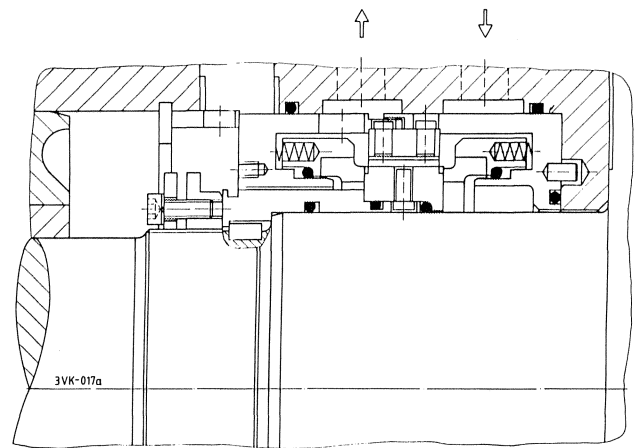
Stationary (Spring-Loaded Parts Nonrotating) Double Mechanical Seal for Rotary Screw Compressors.
